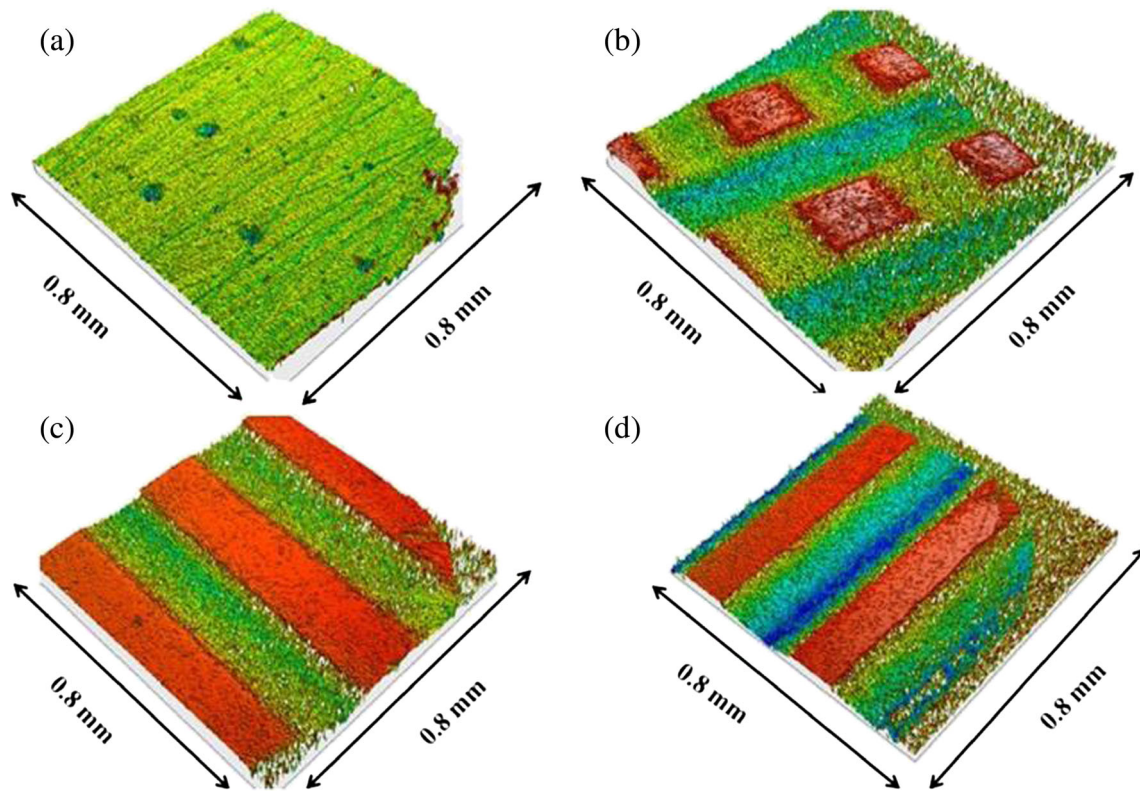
Topography of textures fabricated on tool rake face (a) non-texture (NT); (b) cross-texture (CR.T); (c) grooves parallel to chip flow (PA.T); (d) grooves perpendicular to chip flow (PE.T) [111]
